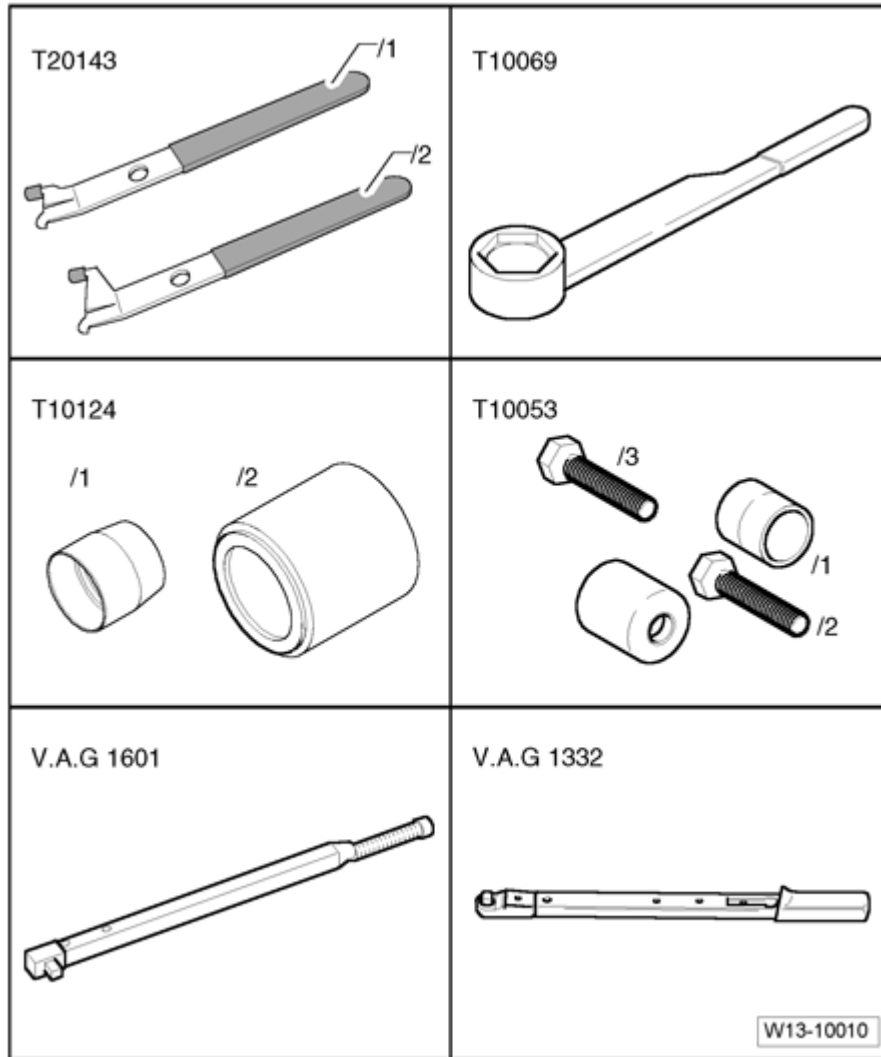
Identifying Special Tools - Crankshaft Seal, Vibration Damper Side, Removing And Installing
